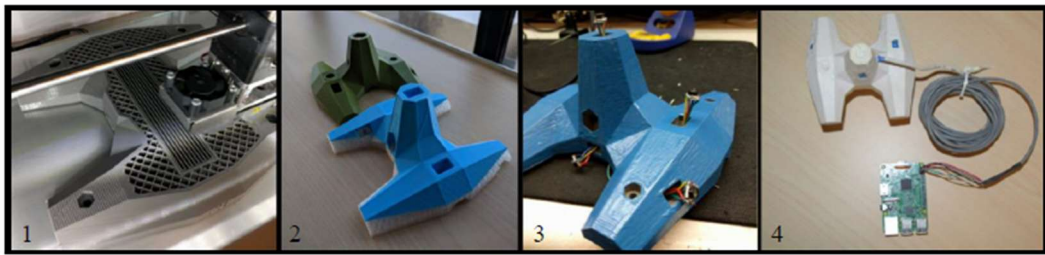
Printing the unit (1), printed unit (2), circuit assembly (3), and final instrumented unit (4) (Eden, 2019).
